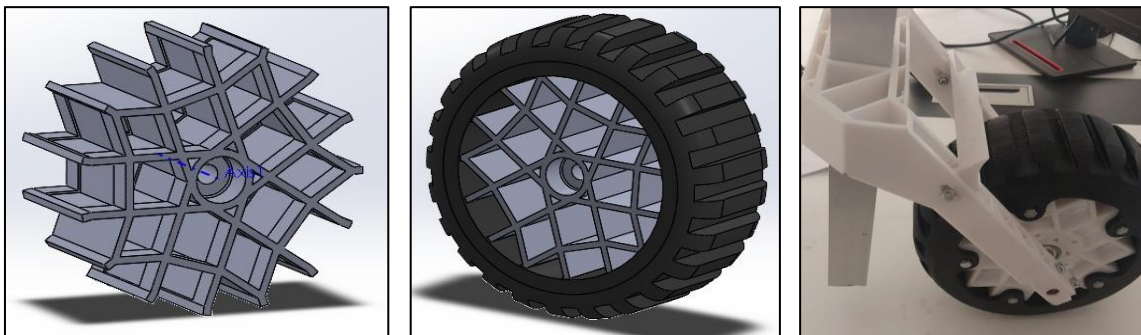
CAD design of the wheel rim and tire, assembled wheel with 3D printed parts.
